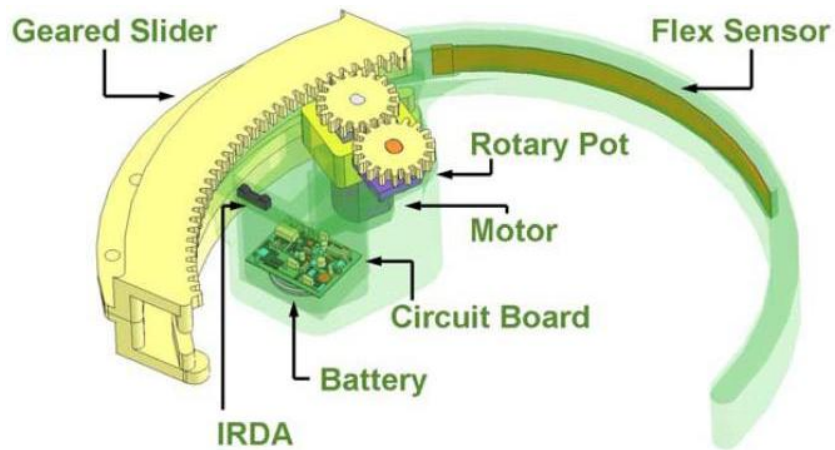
A C-leg rigid slider assembly with desired components incorporated into the leg structure.
